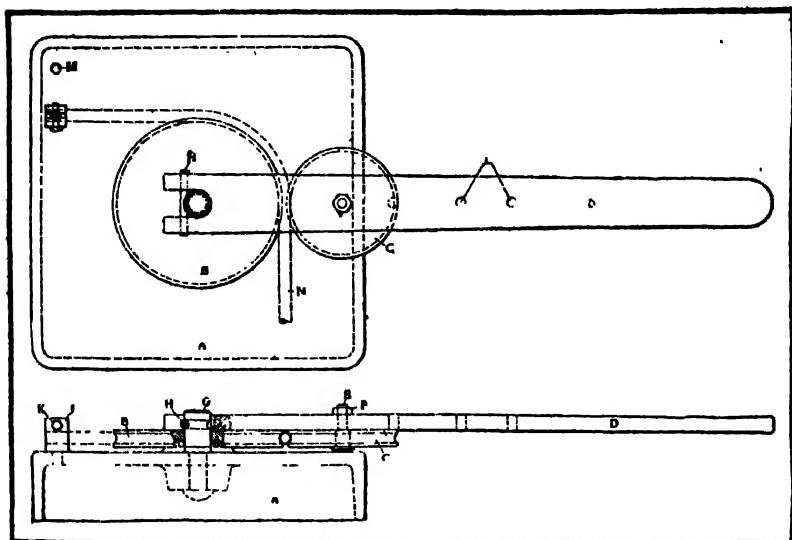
Simple Fixture for Bending Tubing Without Damaging the Walls.
